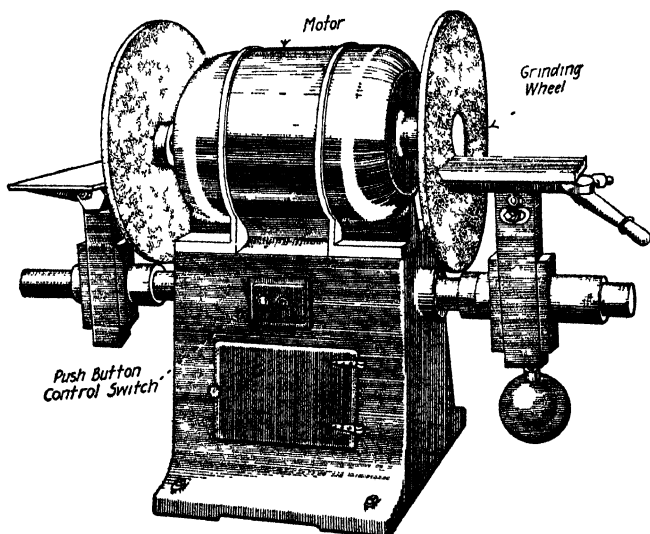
A disc grinder on which all wiring is concealed and which is controlled by a remote-controlled switch.
